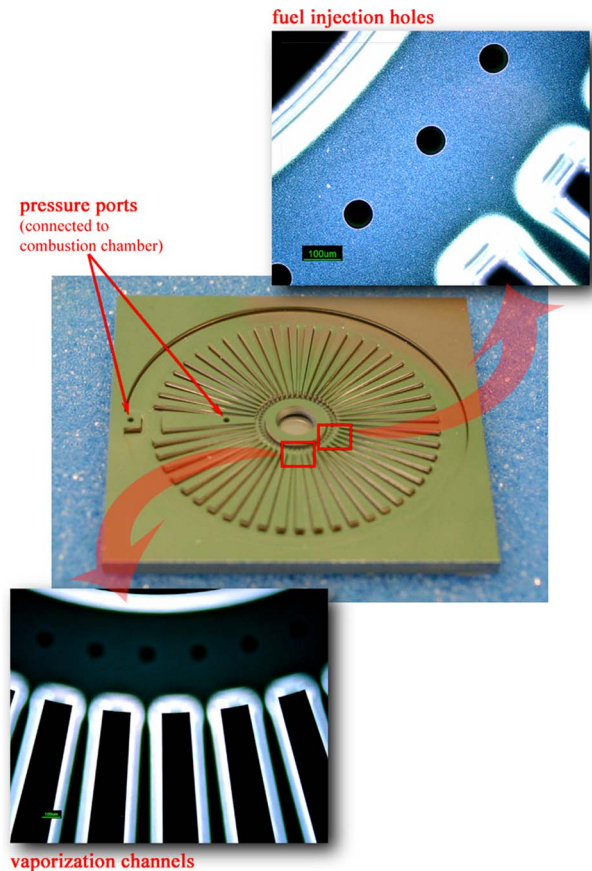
Front side of the completed silicon piece (showing the front side of layer 3)
